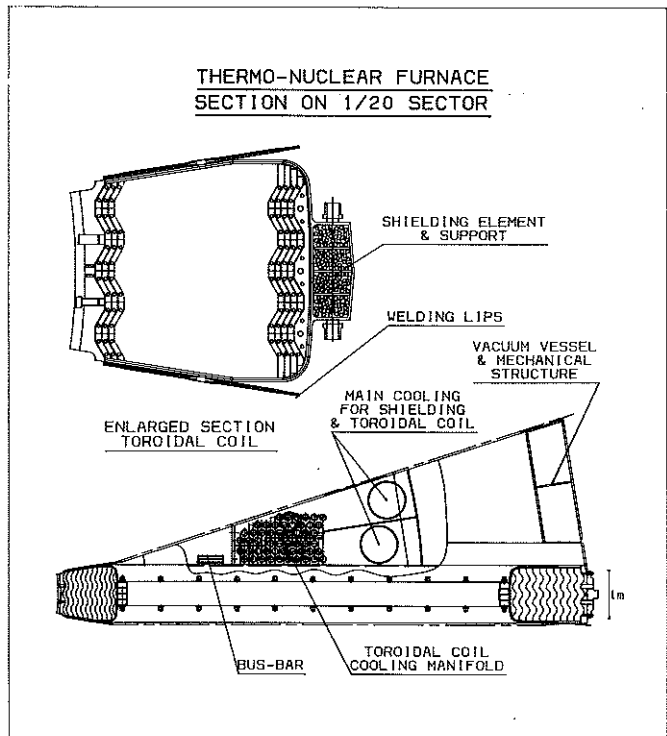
Section of a sector of JIT conceived as an integrated element including the toroidal coil, the vacuum vessel, and the mechanical structure. Toroidal field coils are shown.
